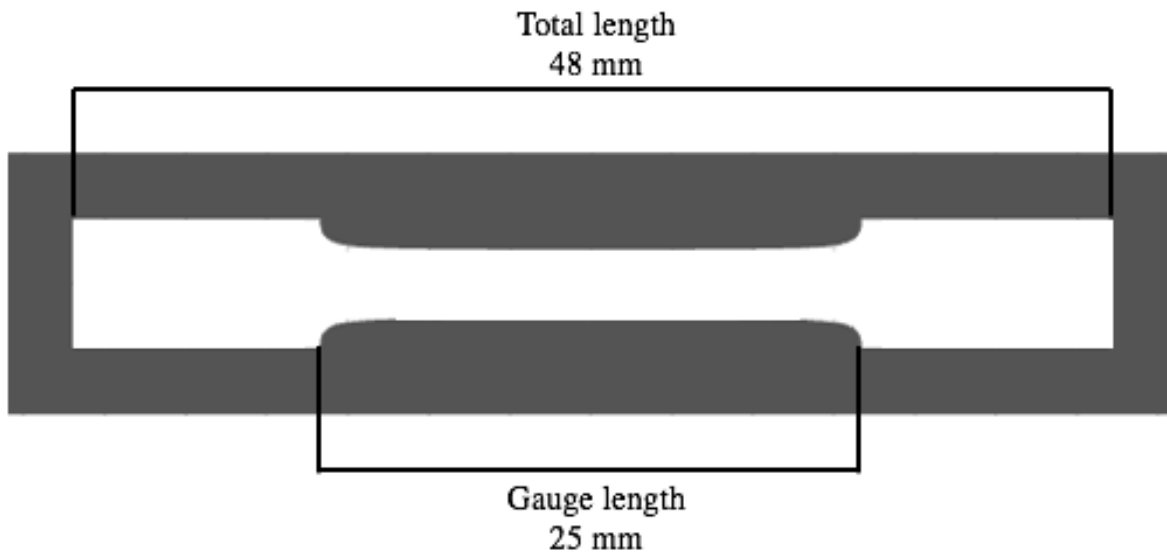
Tensile bar mold design used for the fabrication of metallic tensile bars. Width (W)= 3.12 mm, Thickness (t)= 3.15 mm
